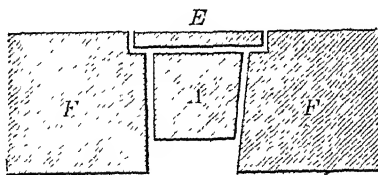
CAR CASTING, MOVABLE STOOL-PLUG, LARGE SCALE.
